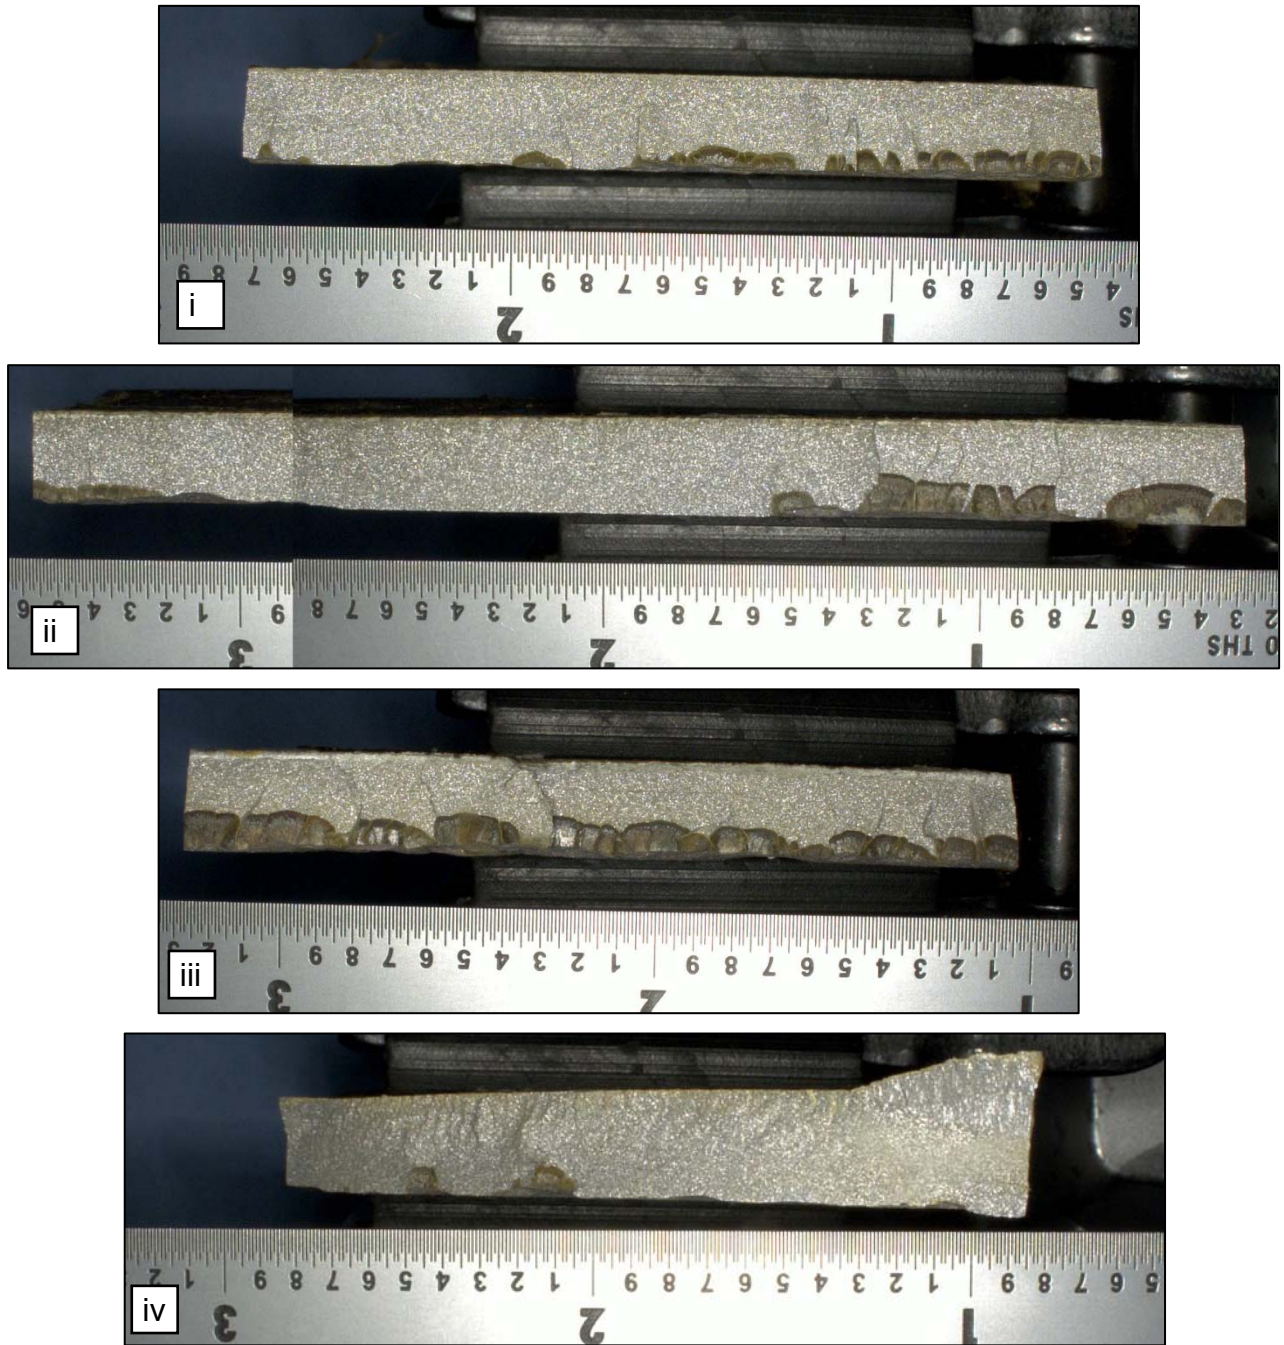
Overall views of lab fracture surfaces of samples B2d2i-iv. The ruler is adjacent to the outer surface in each photo, and the pipe flow direction is from left to right.
